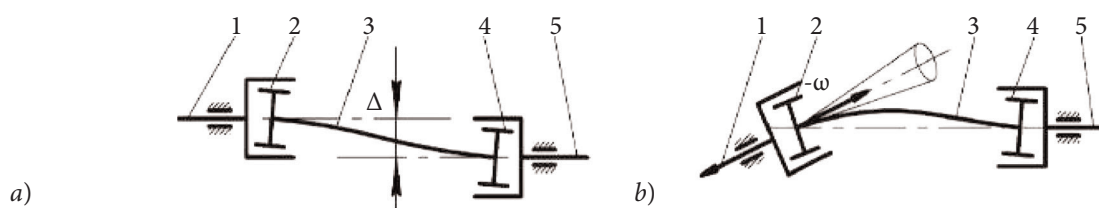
Shift (a) and misalignment (b) of the engine axis:
